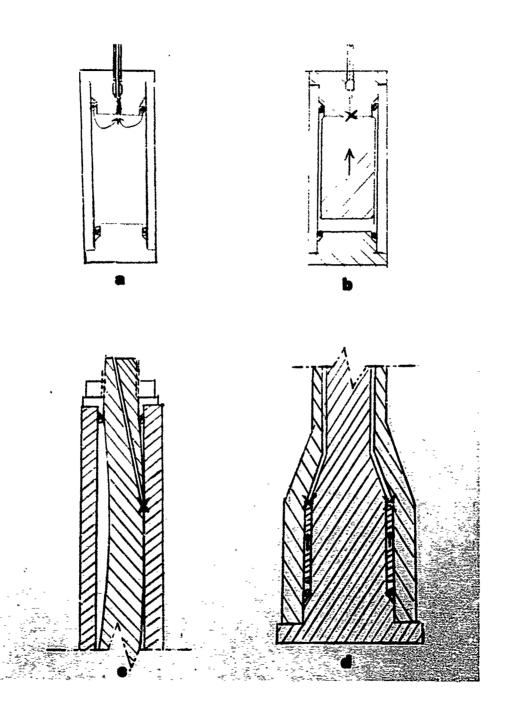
Trapped fluid problem: (a) port plugged with seal material; (b) filler bar blockage; (c) mandrel bend; (d) sleeve shift.
